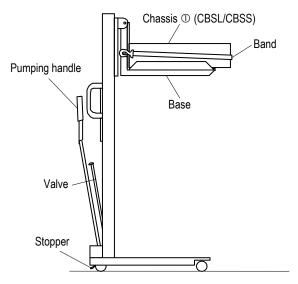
Secure the "Chassis ① (CBSL/CBSS)" (the Controller Box)
